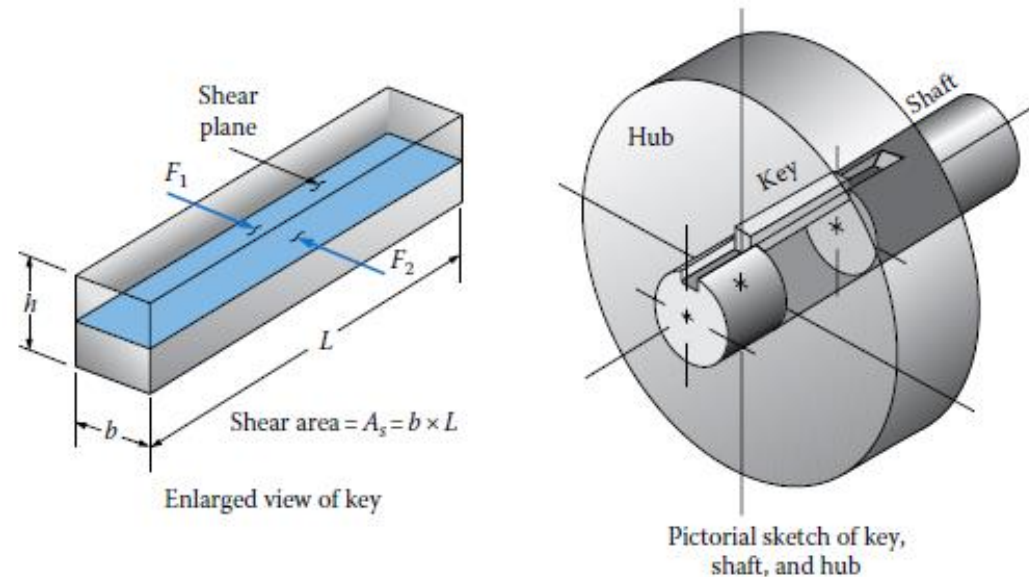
Direct shearing action on a key between a shaft and the hub of a gear, pulley, or sprocket in a mechanical drive system.
